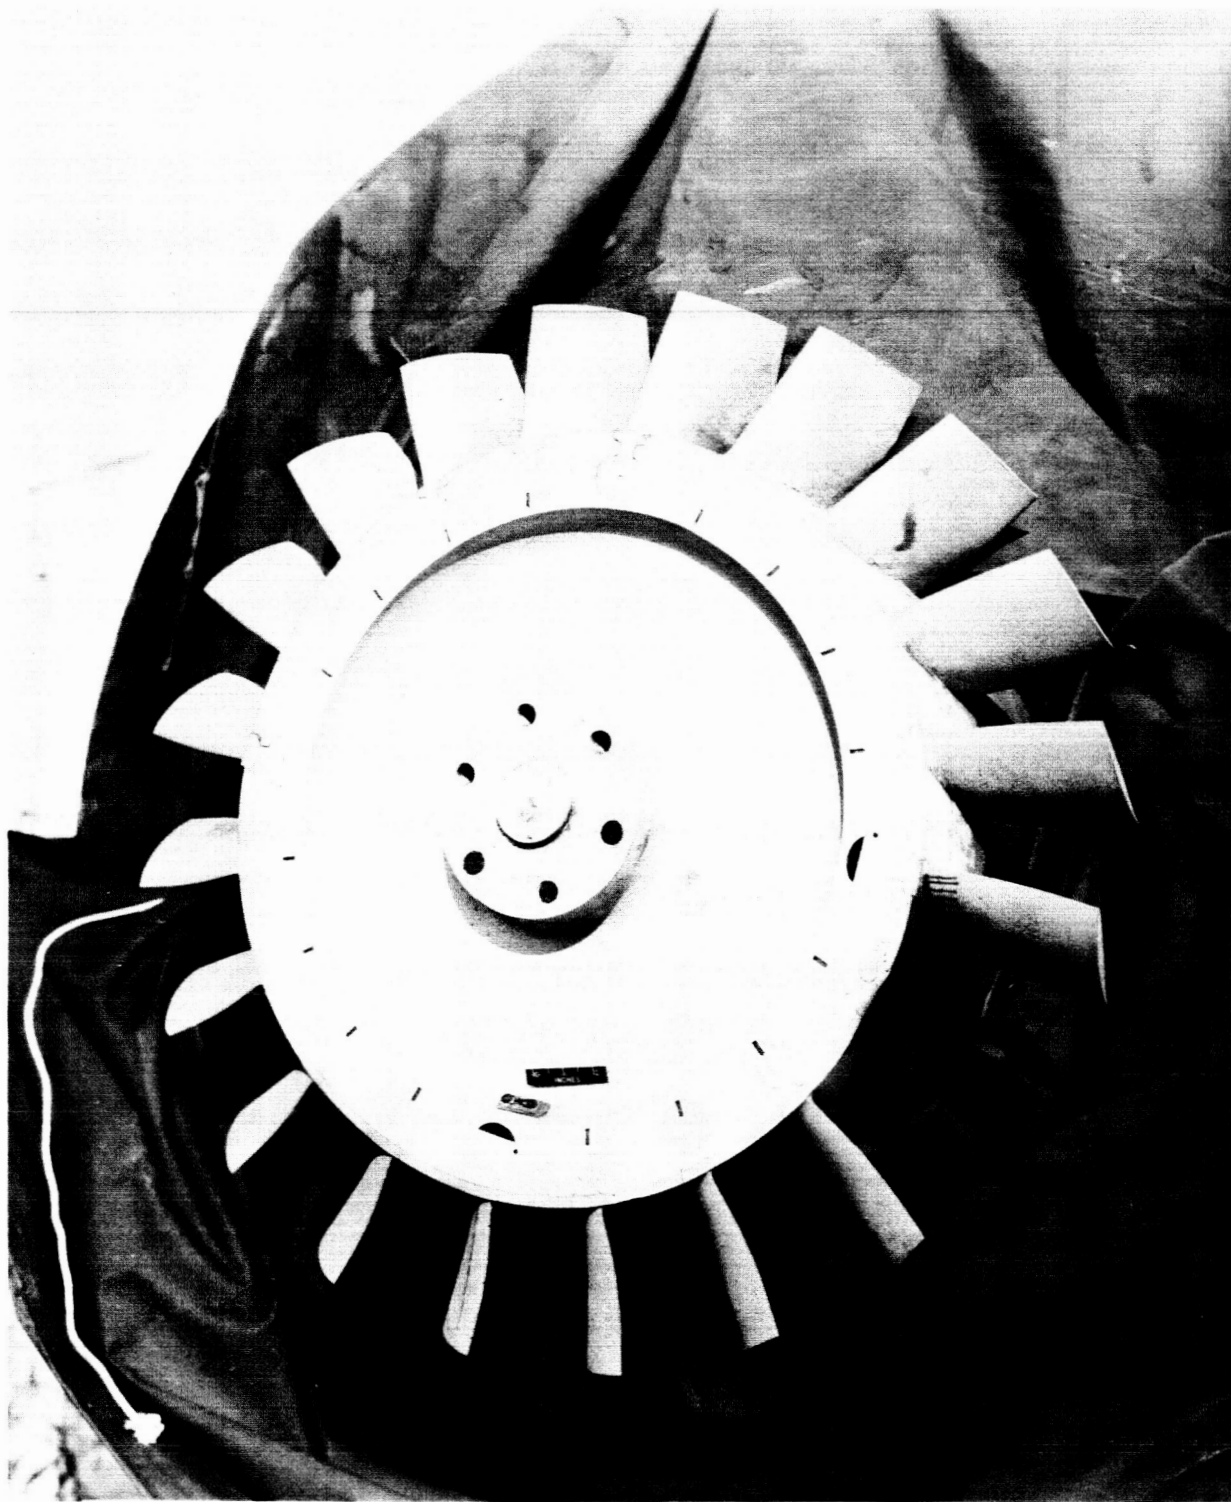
Photograph of rotor 2 wheel assembly (20 blades). L-63-10009
